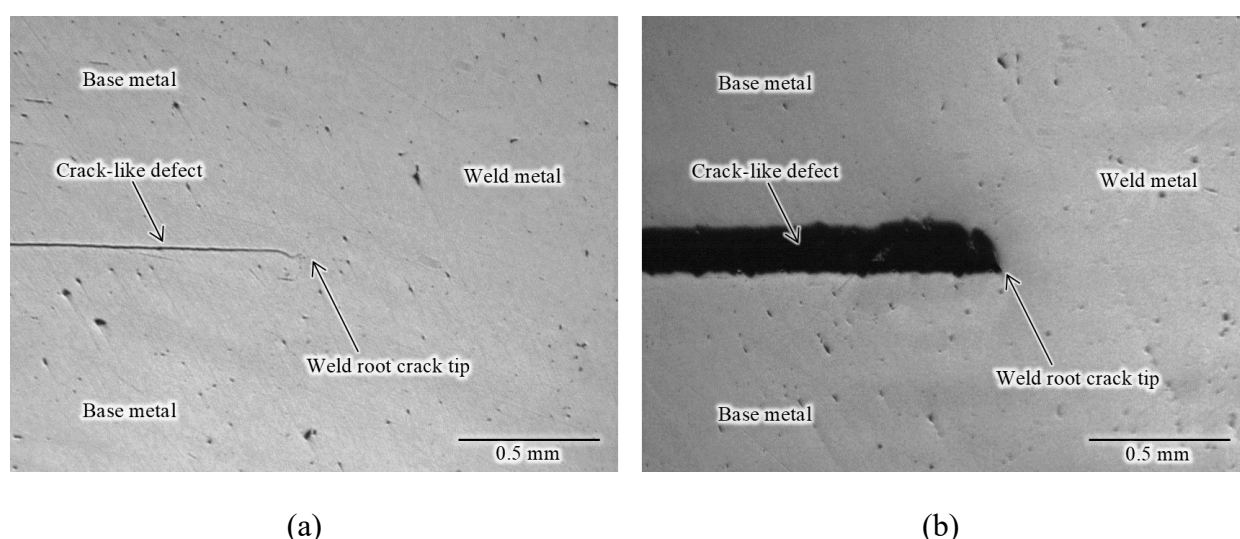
Micrographs of weld root crack tips untested at the end of PJP welds: (a) a specimen with a small plate gap and (b) specimen with a large plate gap
